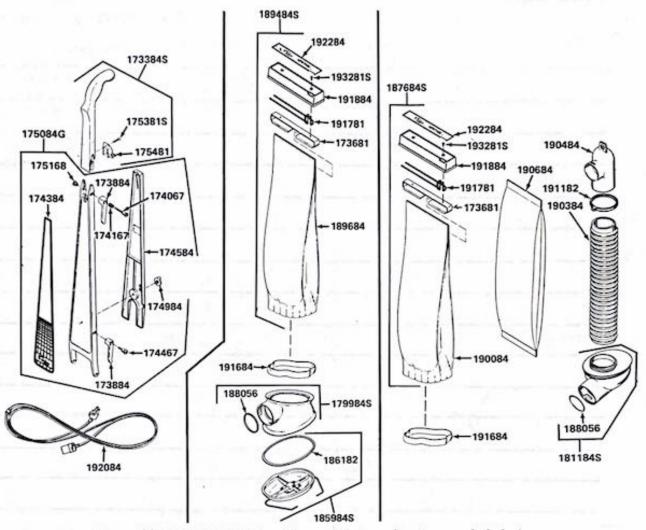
HERITAGE II handle, cord, bag, and emtor, exploded view
